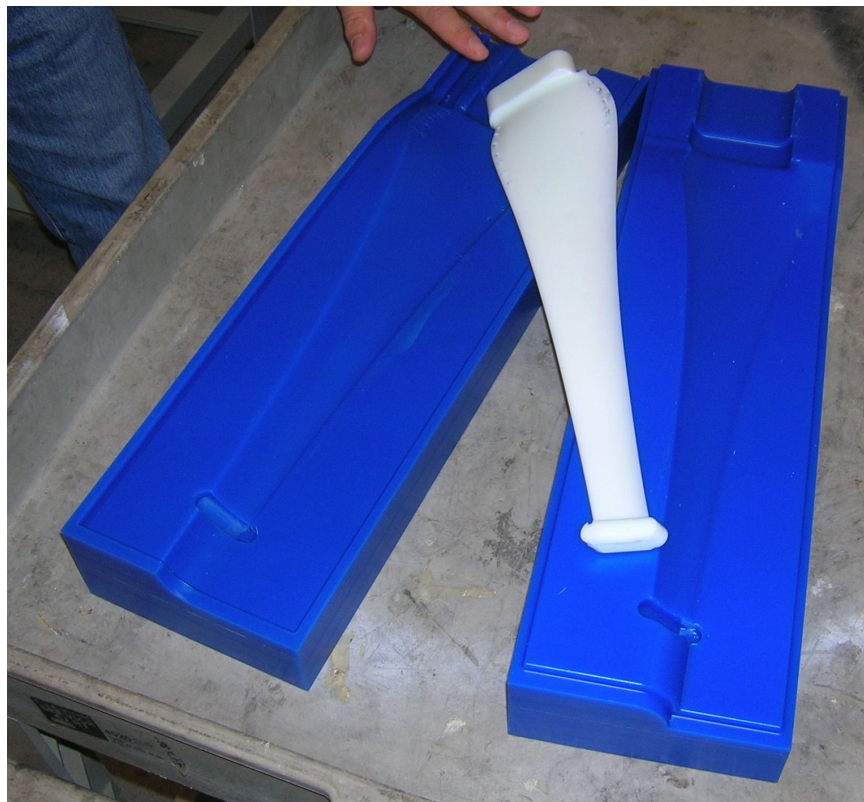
A machinable wax mold used for casting blades for a student-designed rotor
